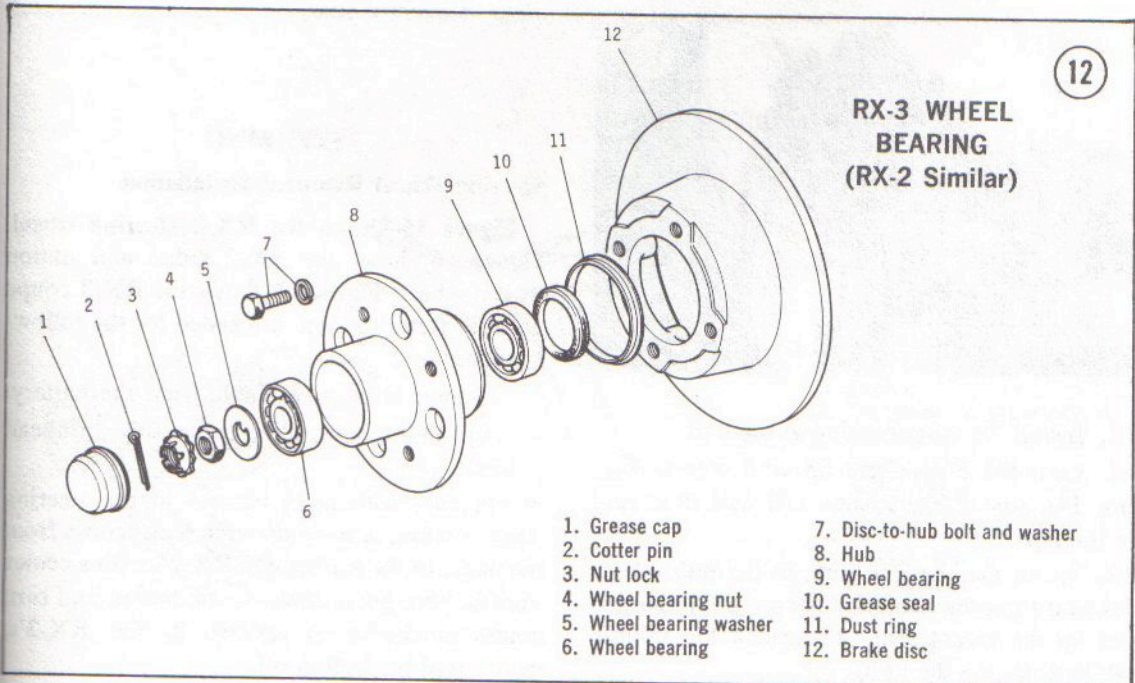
shows the RX-3 wheel bearing components. The RX-2 arrangement is basically the same. Refer to it as needed for the following procedures.
